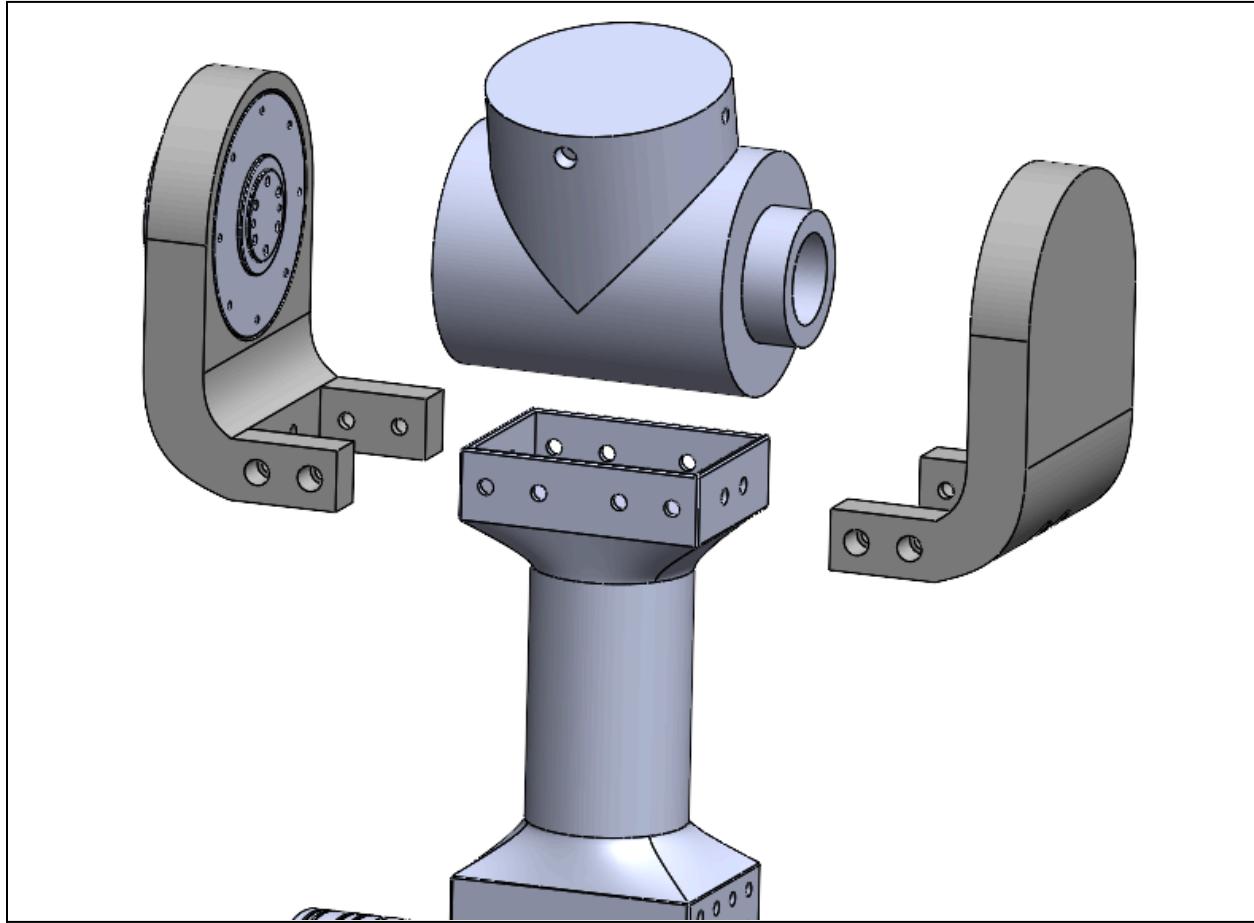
shows the construction of every component up to the Bicep linkage. Due to missing soldering tips and fasteners, a mock assembly can be seen below of how these subassemblies work together.
